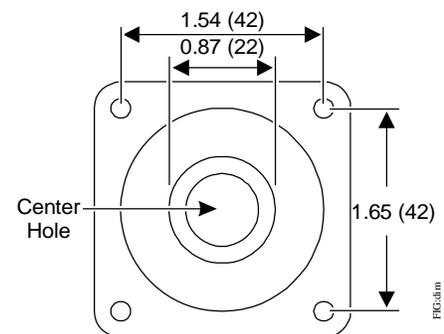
Mounting Holes on the Flange Dimensions in. (mm)
